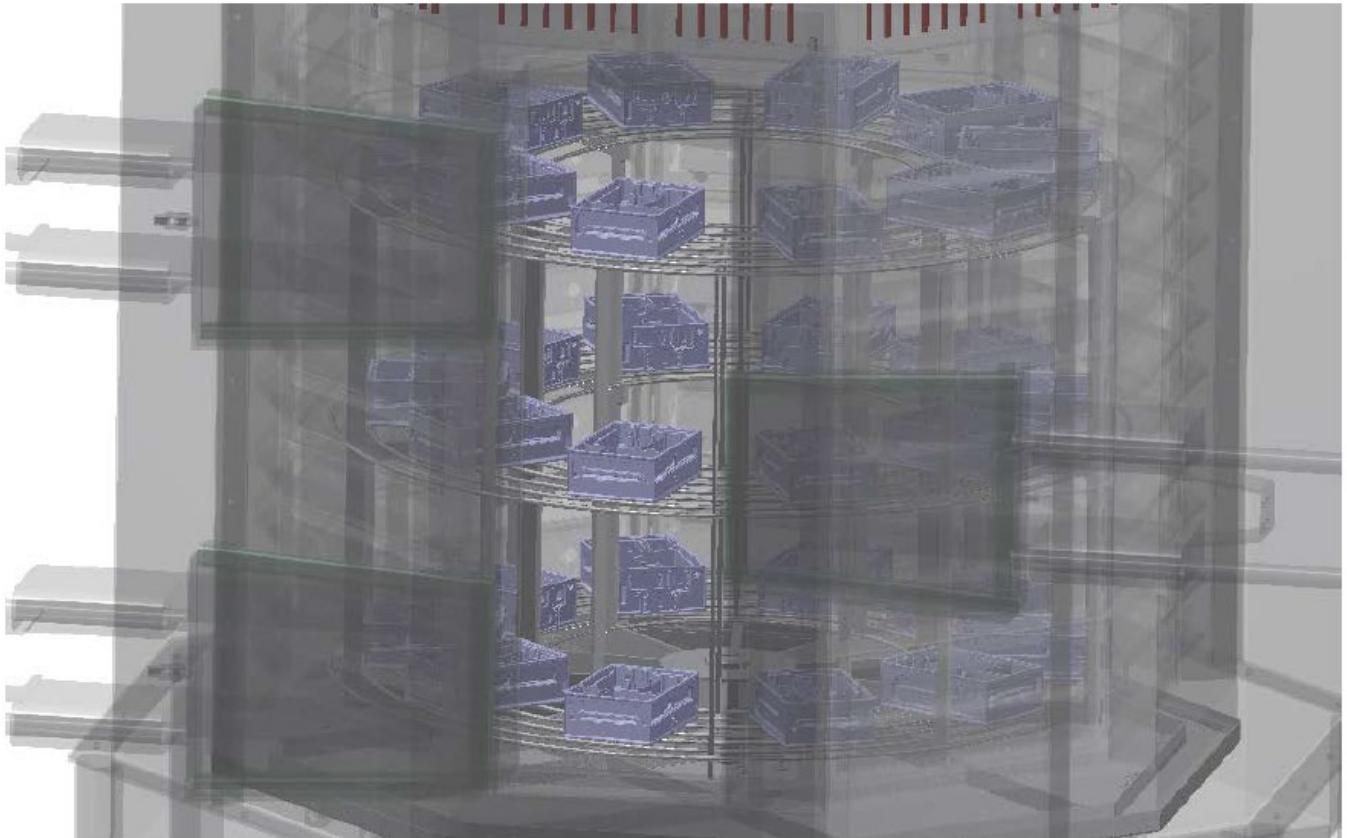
Detailed view of casting parts within the solutionizing furnace.
